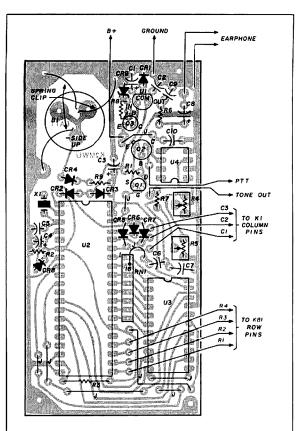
Parts placement for the PC board. All parts mount on the board except the keypad and earphone.
